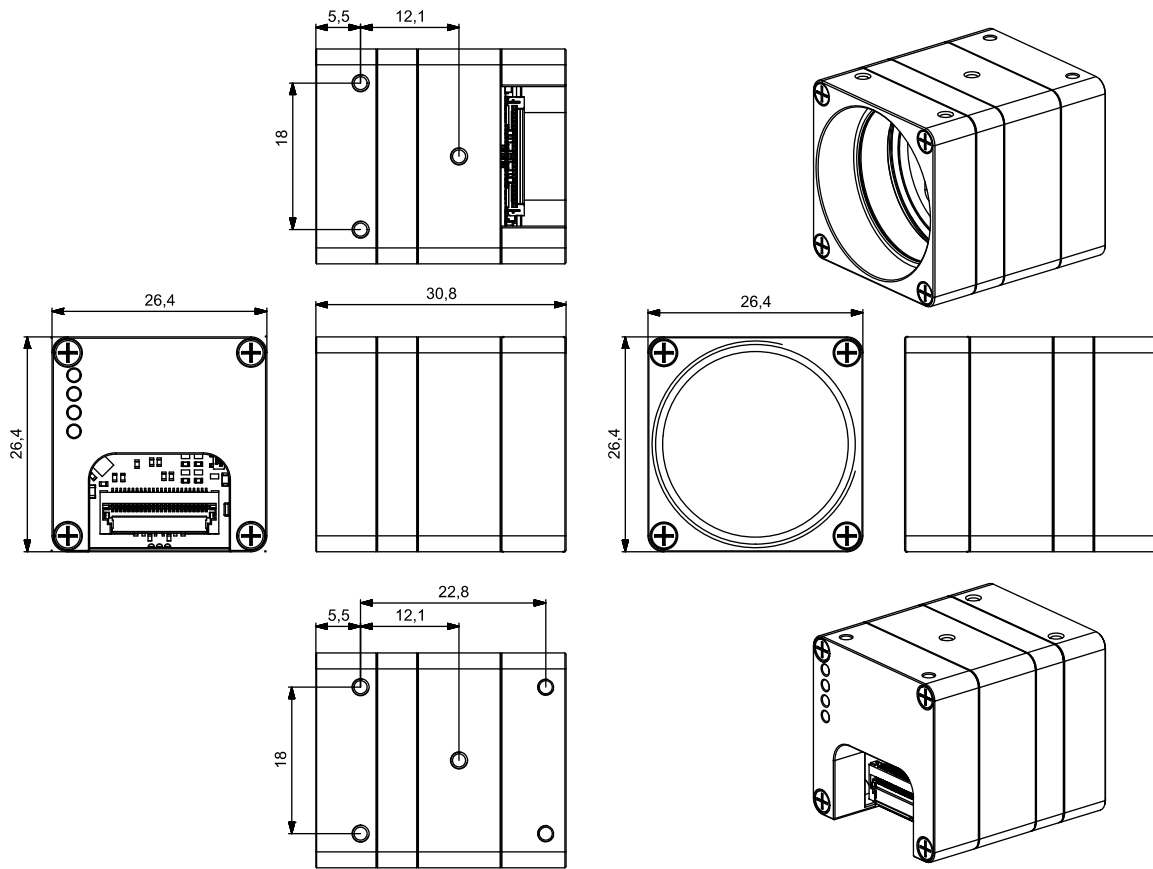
Dimensional drawing of MX031/050xG-SY-X2G2-FL (C-mount (with C-mount module B))
